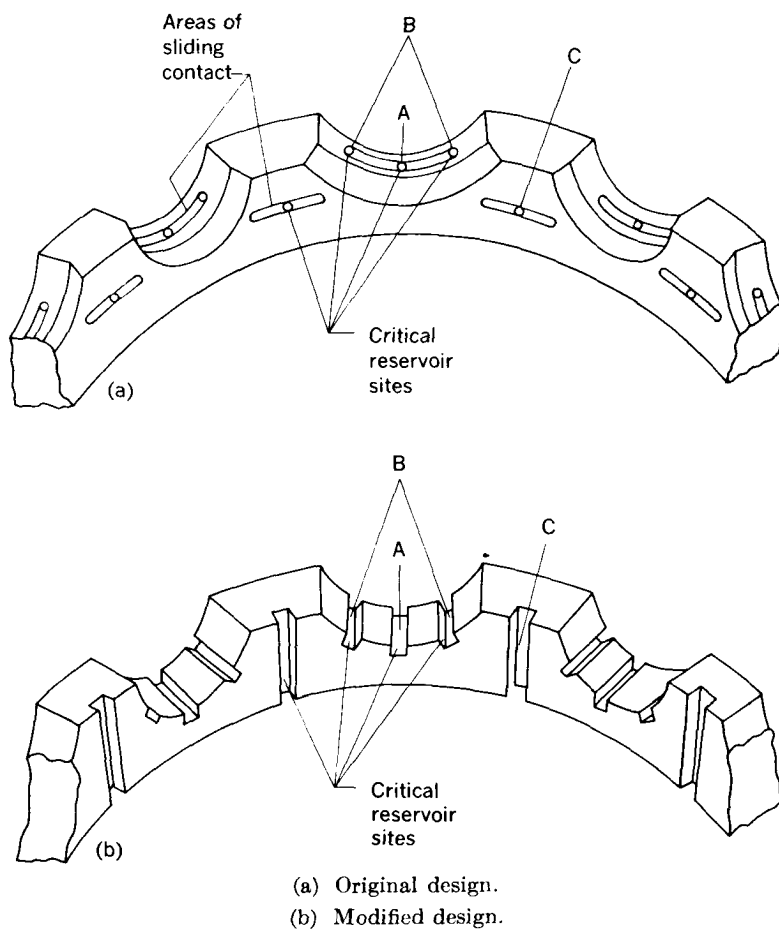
Section of machined bearing retainer. (From ref. 31.)
